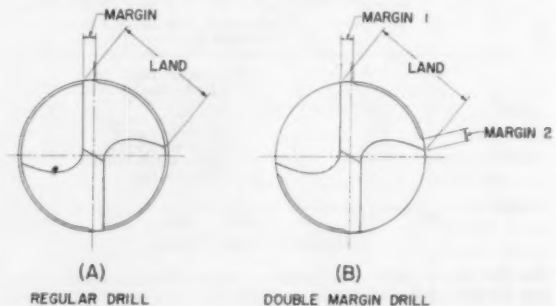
COMPARISON OF A REGULAR DRILL AND A DOUBLE-MARGIN DRILL SHOWING EXTRA MARGIN ON DOUBLE-MARGIN DRILL WHICH IMPROVES GUIDING OF THE DRILL
